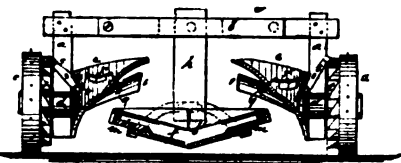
WOOD-SMITH MACHINE: cross-section.
